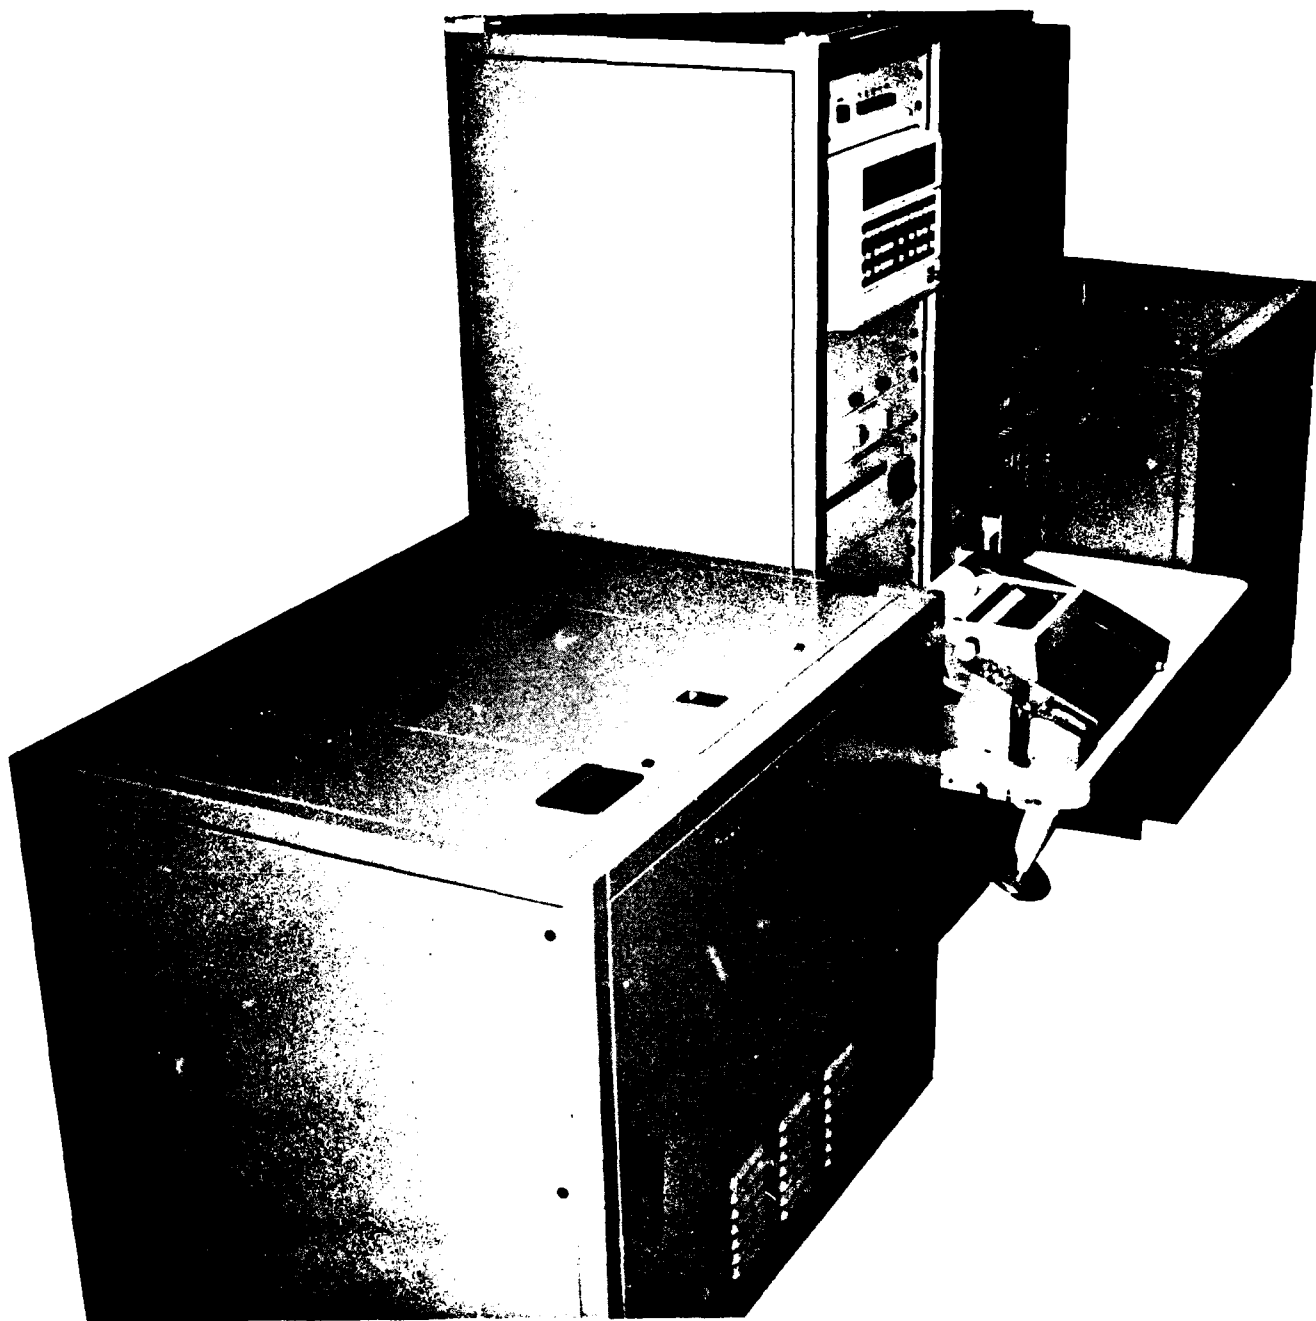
BEARING INSPECTION SYSTEM
